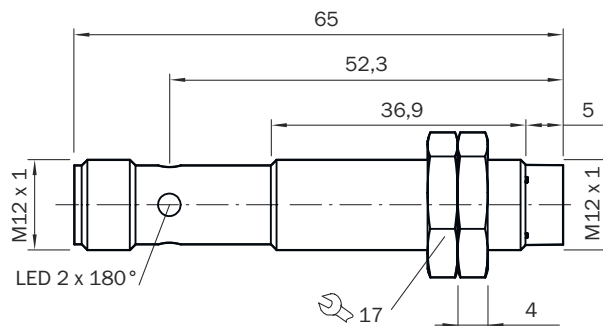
IME2S12-\*\*N\*\*C0 dimensional drawing
